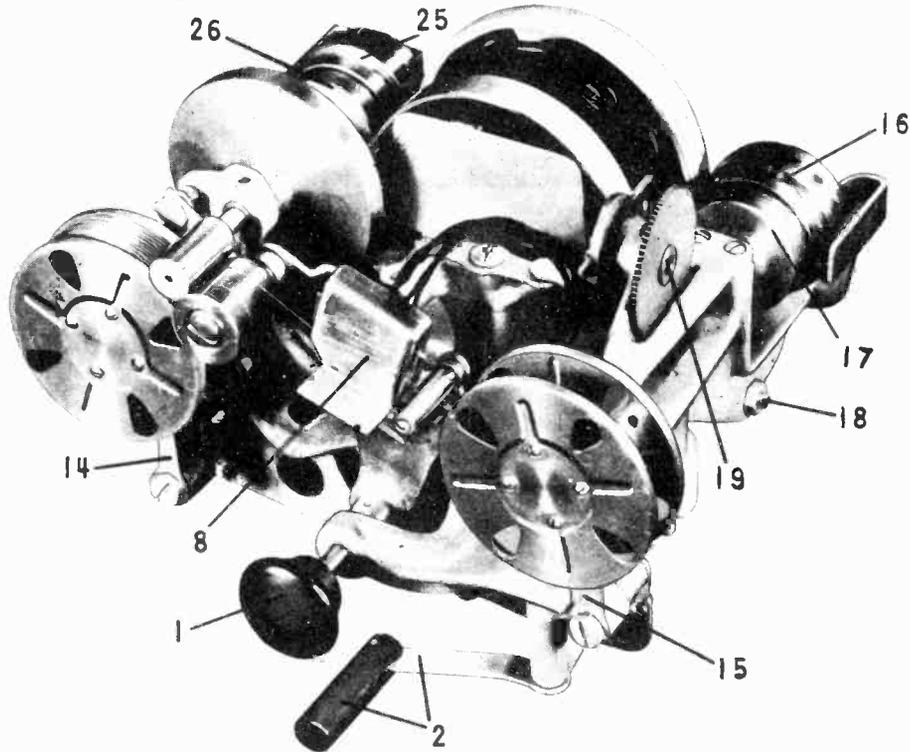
FRONT VIEW - MODEL A-1 WIRERECORDER
